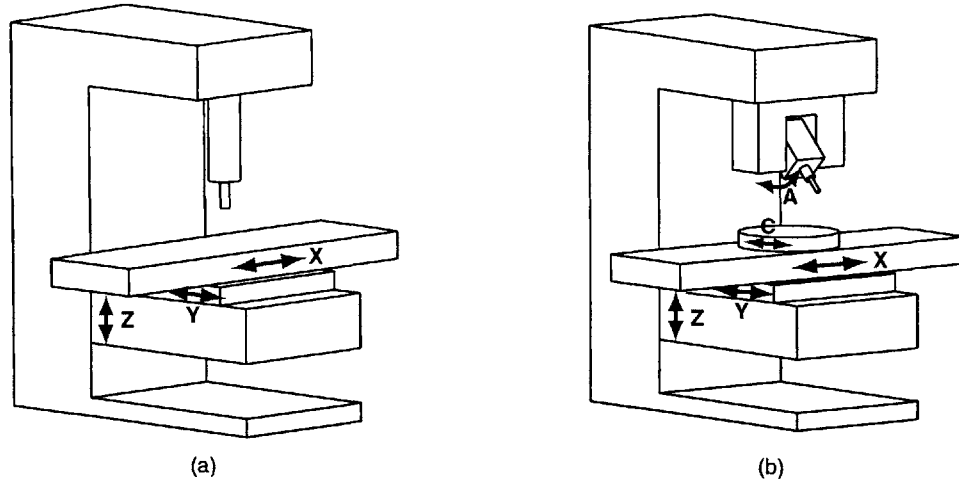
Two examples of milling machines: (a) vertical 3-axis machine (b) vertical 5-axis machine with swiveling spindle (A) and rotating part (C).
